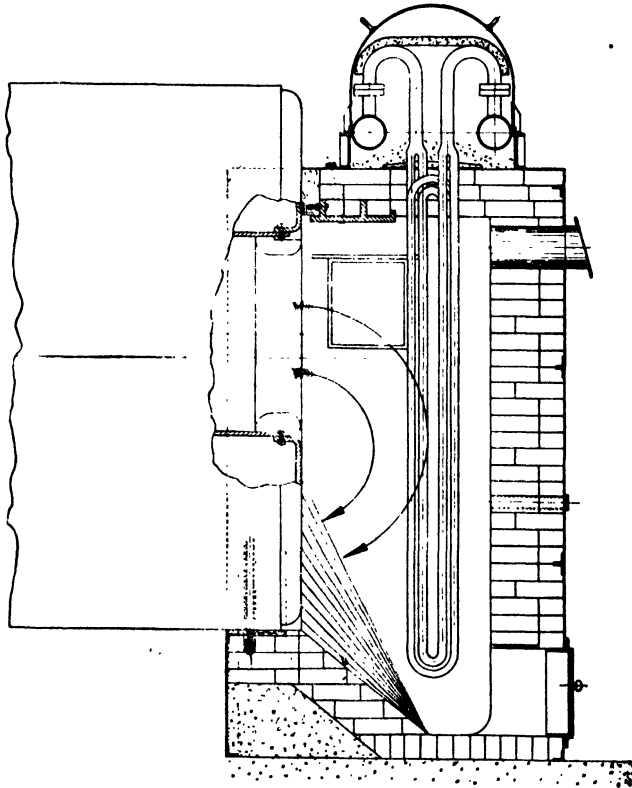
SUPERHEATER FOR LANCASHIRE BOILER
